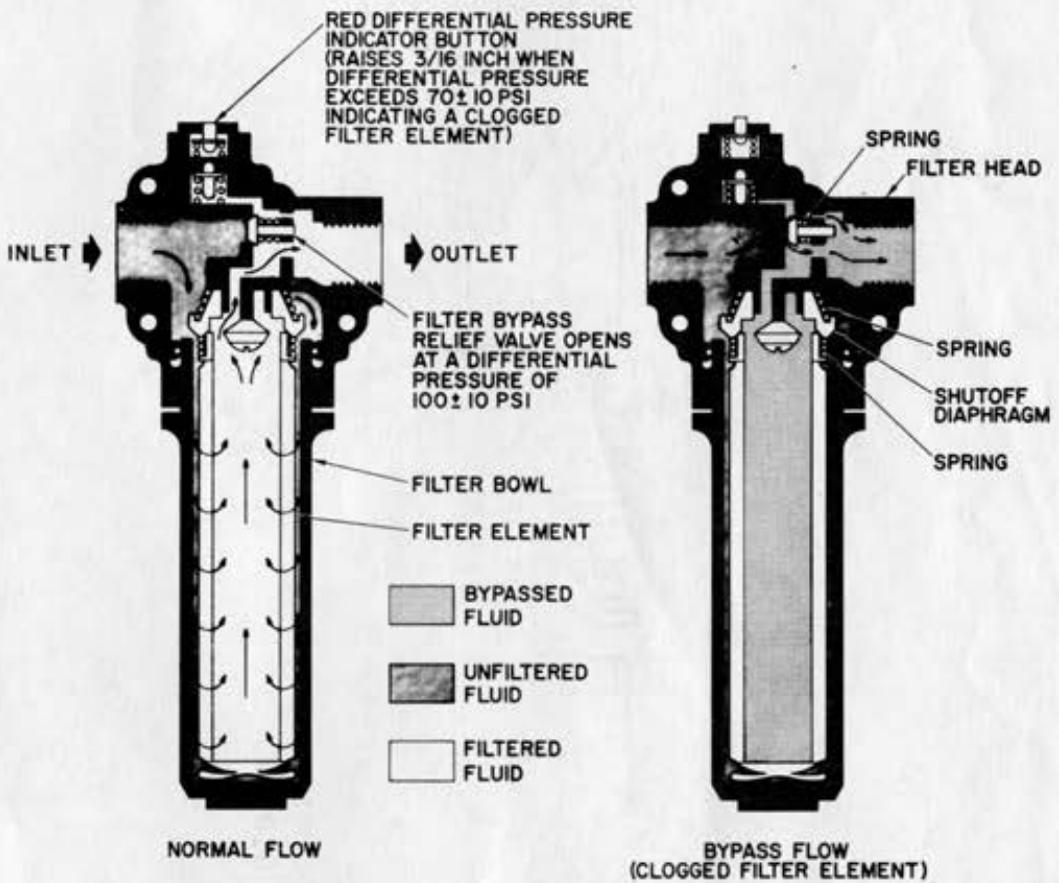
MIL-F-8815 Type Filter Assembly
